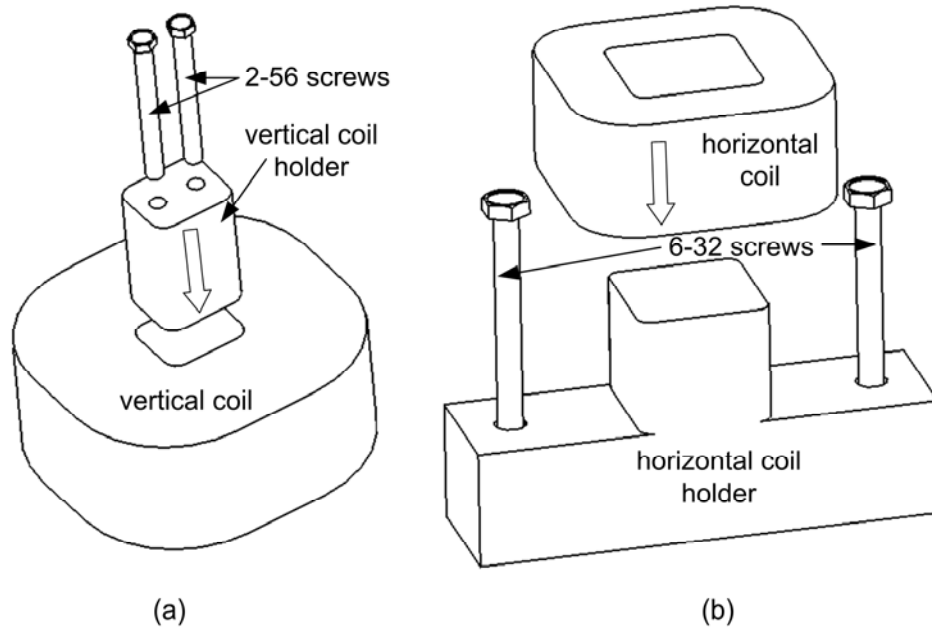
Exploded view of (a) vertical coil and (b) horizontal coil assembly.
